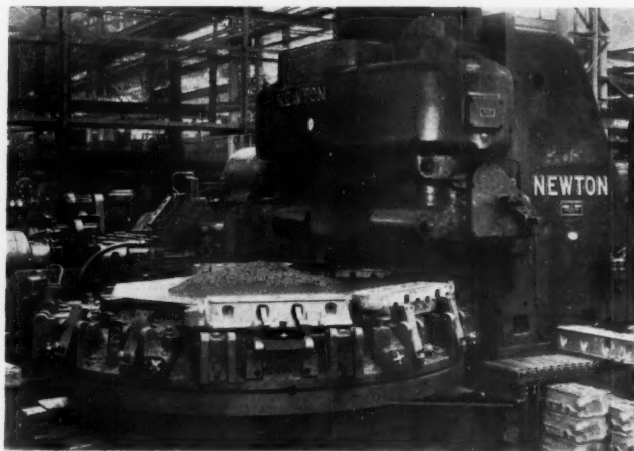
Newton rotary table machine for milling cylinder head, joint and rocker cover faces
